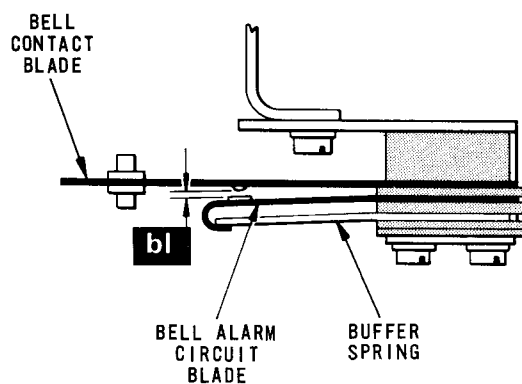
BELL CONTACT SPRING ASSEMBLY
